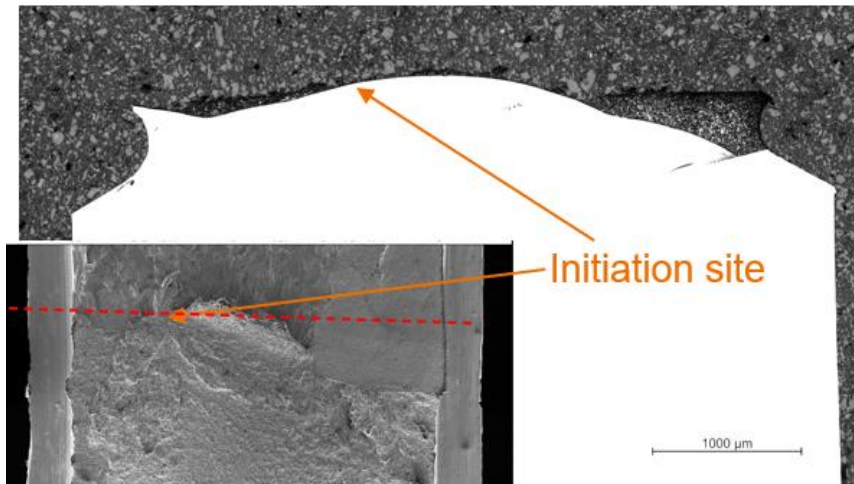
Fractography and cross-section. Sample condition TA 10 000 h.
